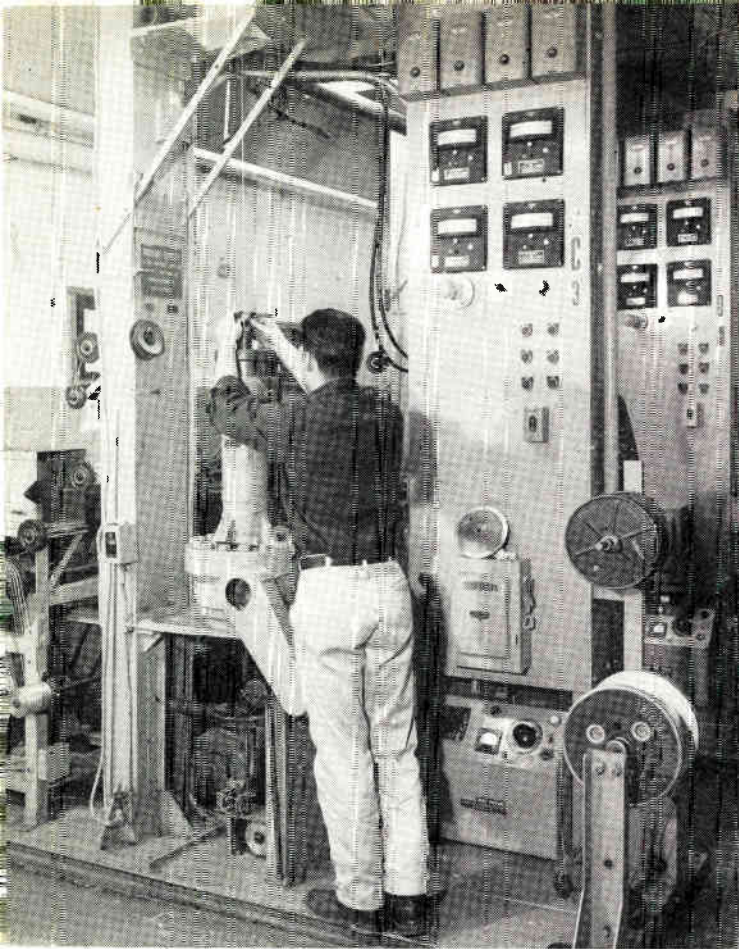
Ram type extruders are used to manufacture Teflon insulated hook-up wire. Diameter is being checked by operator.
